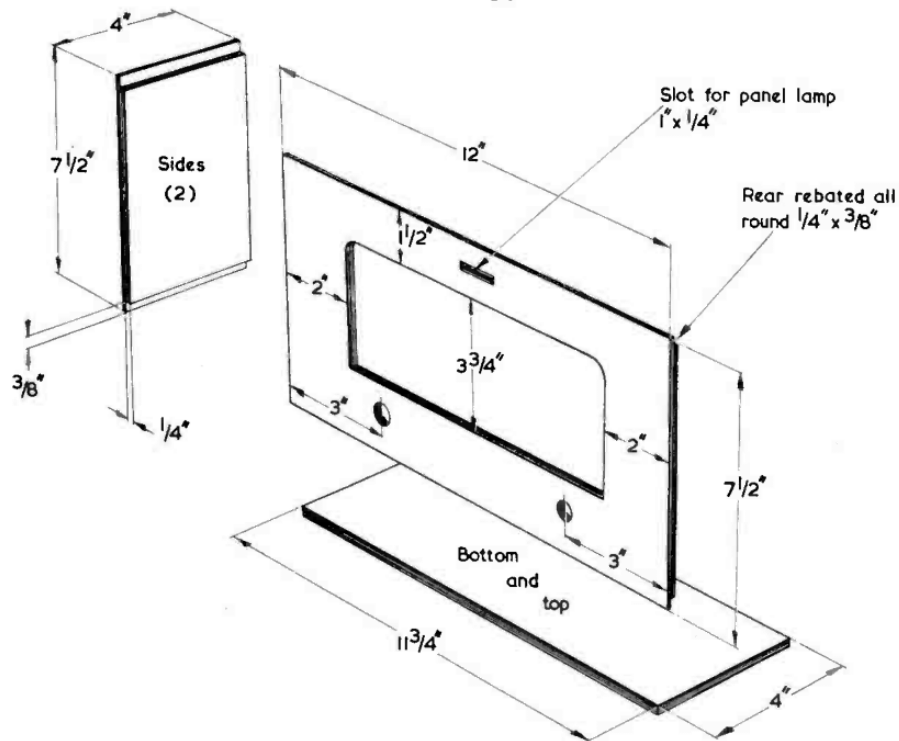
Making a cabinet for the "Beatamp". The material is faced plywood  $\frac{3}{8}$  in thick. The spindle holes may be marked out from the chassis
